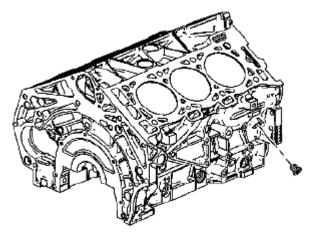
Identifying M14 Right Side Coolant Drain Threaded Plug Courtesy of SUZUKI OF AMERICA CORP.
